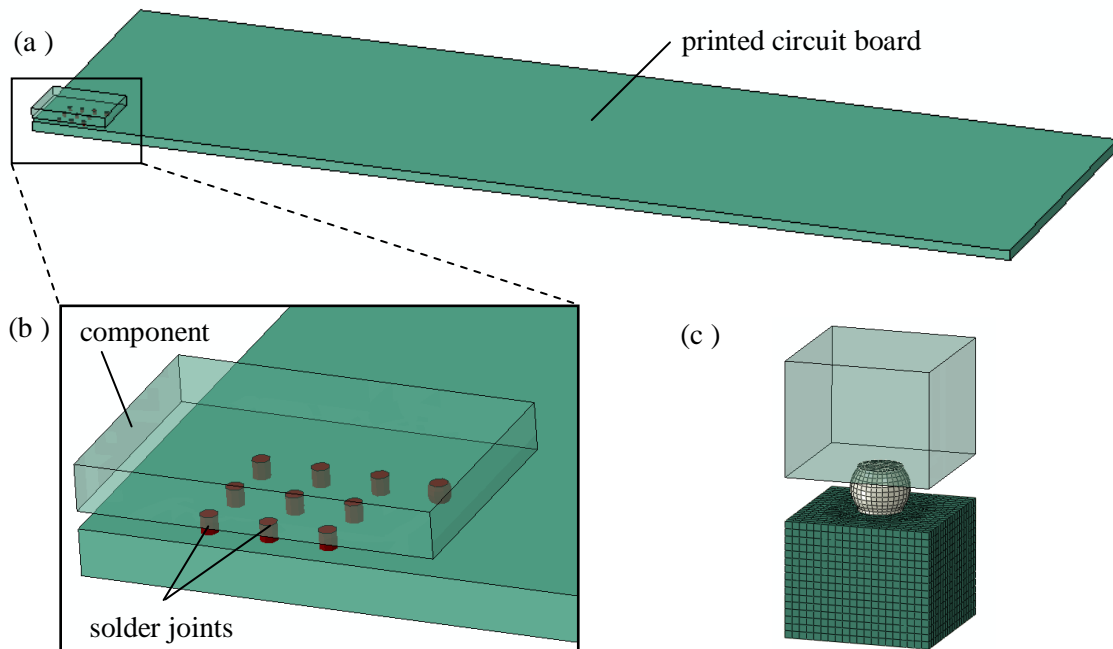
(a) Finite element model of quarter of printed circuit board with component (b) Magnified view of component, showing solder joints (c) Submodel of critical corner joint
